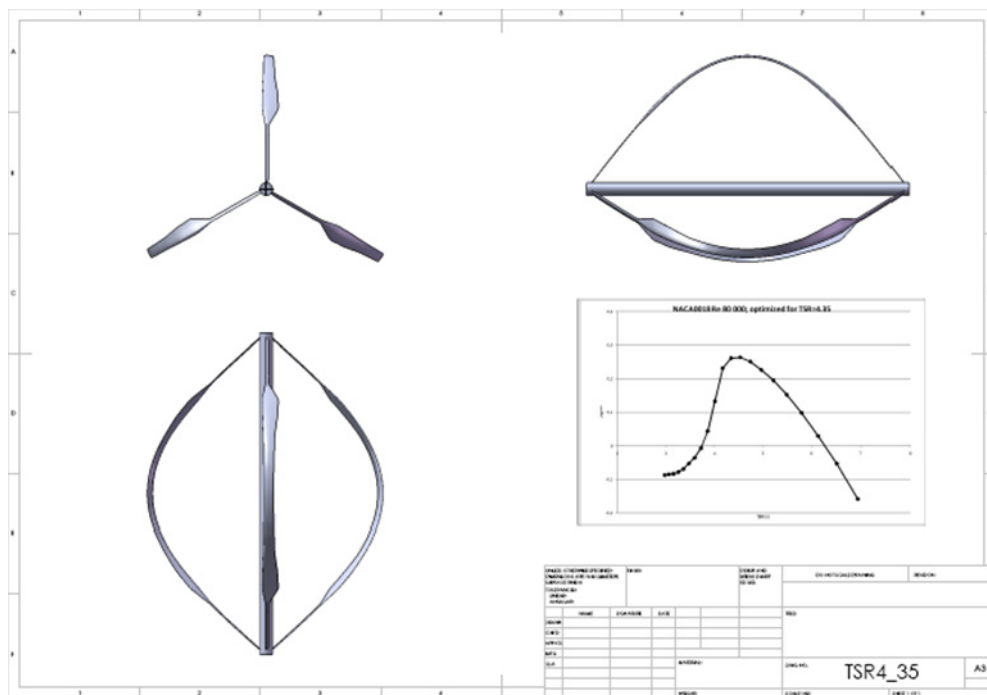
Technical drawing of the rotor optimized for $\lambda=4.35$
